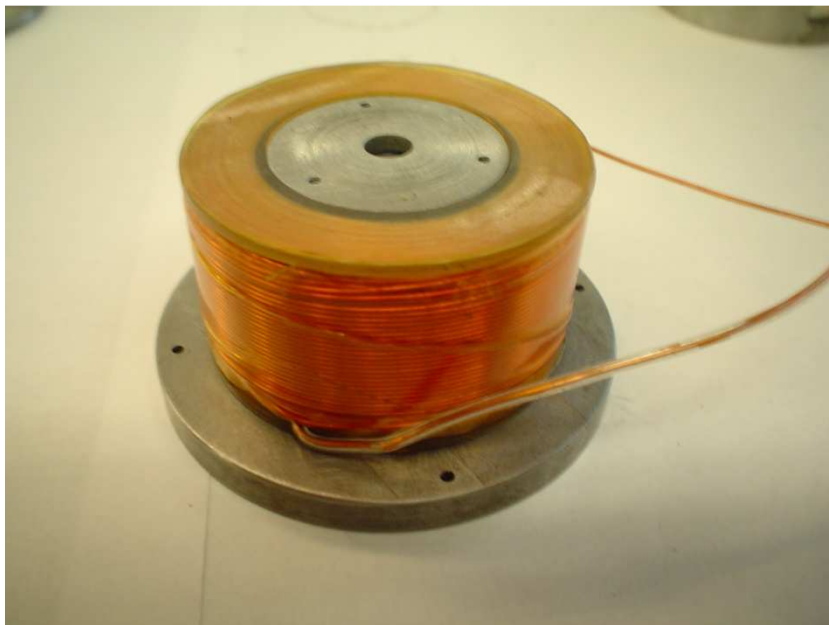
shows the assembled base plate and coil core. They were attached using three (3) 1-64 flat head (82°) screws.
